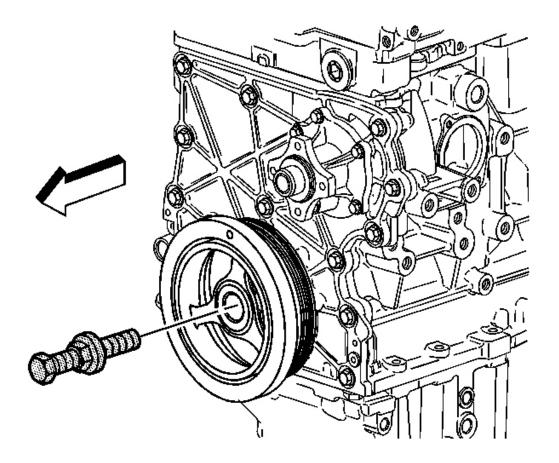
Installing Crankshaft Balancer Using The J 41478 Courtesy of GENERAL MOTORS CORP.
